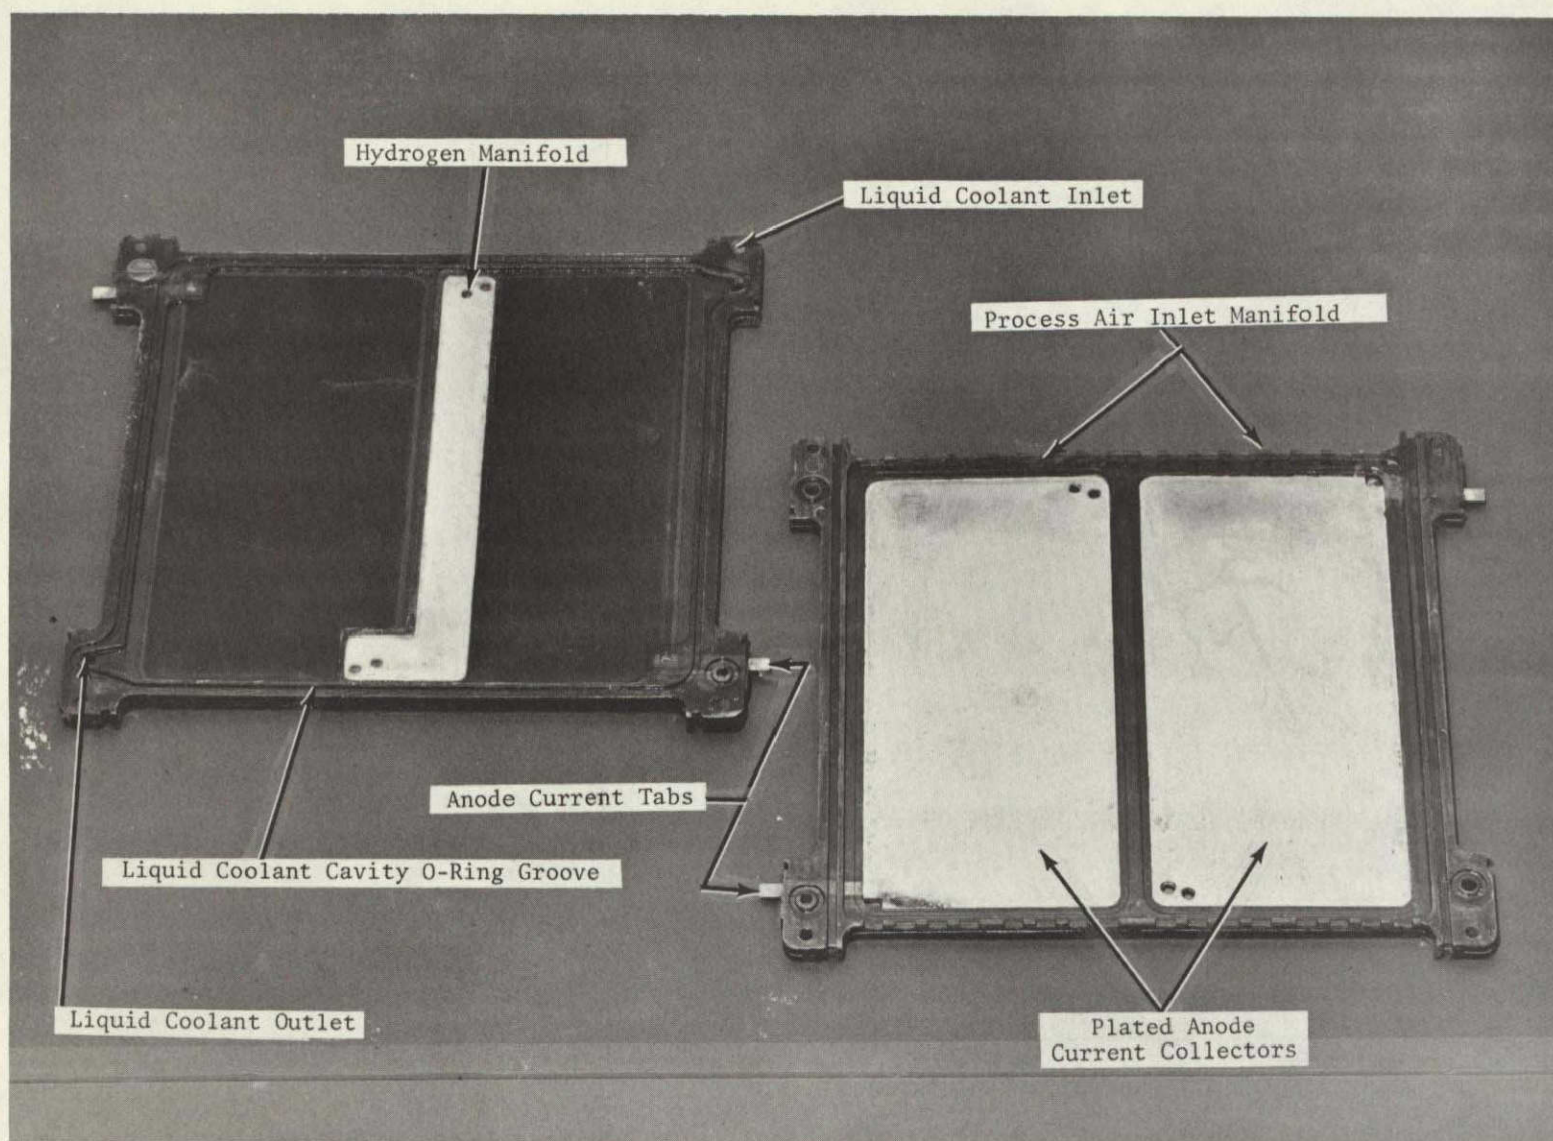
INJECTION MOLDED CELL FRAME FOR LIQUID COOLING
